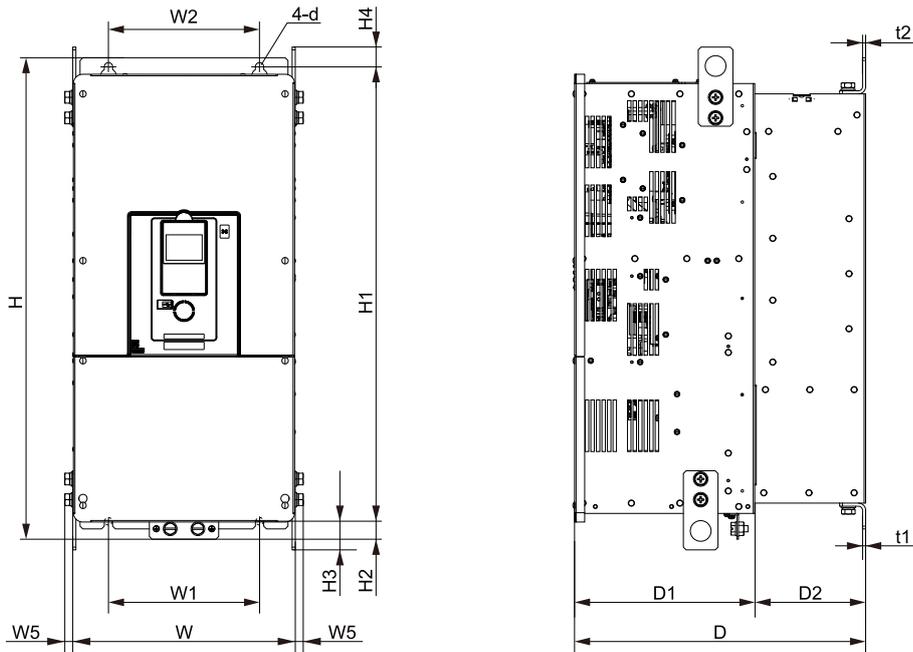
Exterior and Mounting Dimensions Diagram 7
